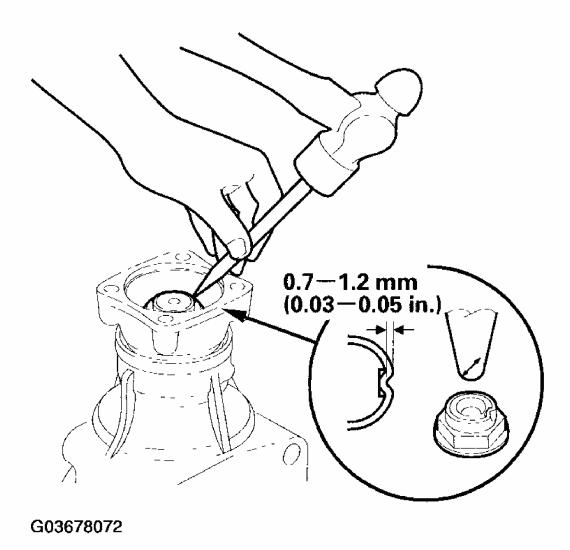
Staking Locknut Into Transfer Driven Gear Shaft Using 3.5mm Punch Courtesy of AMERICAN HONDA MOTOR CO., INC.
